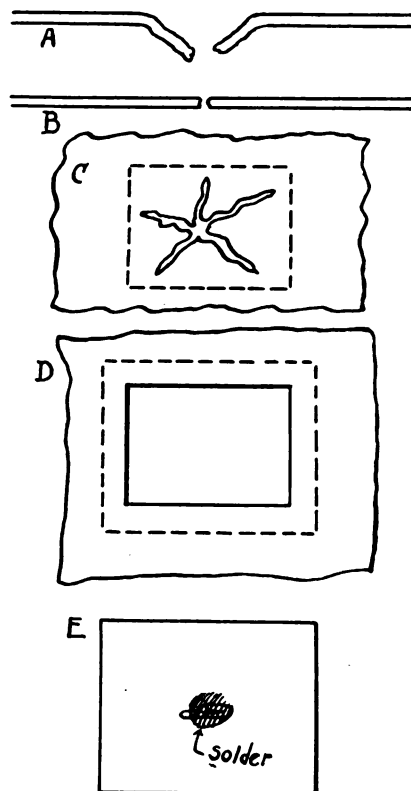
THE BROKEN SECTION IS CUT OUT AND A NEW PIECE OF SHEET METAL SOLDERED INTO PLACE
